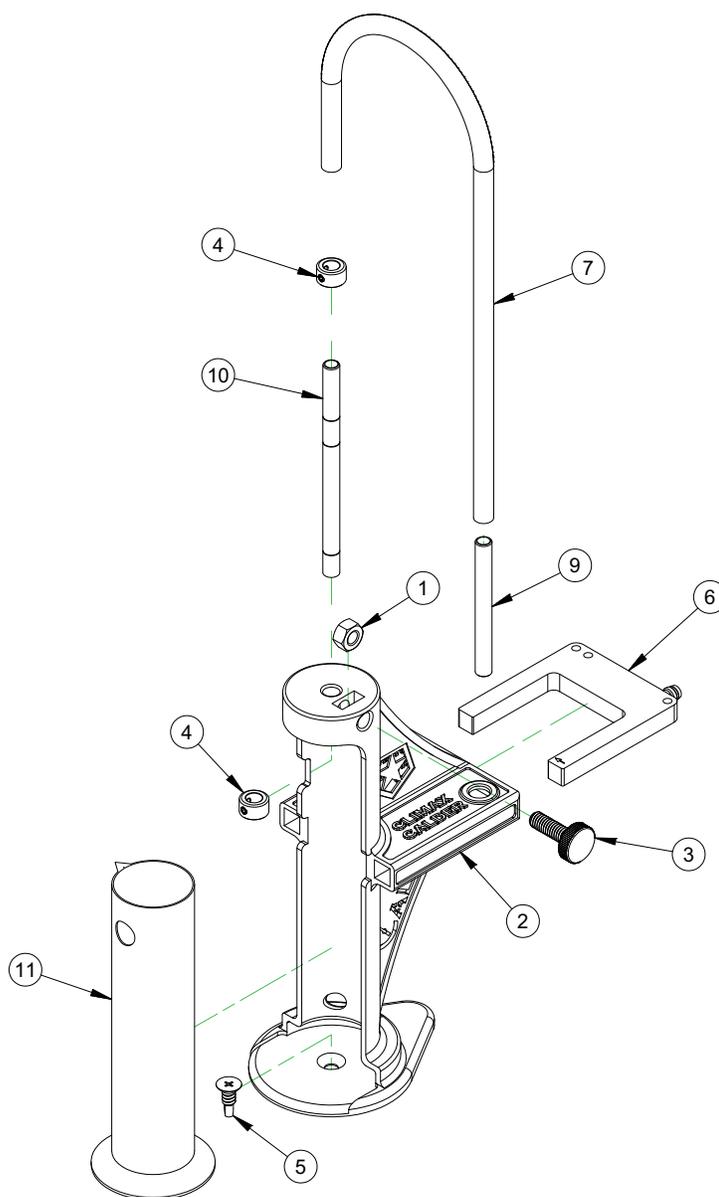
DAAS ASSEMBLY (P/N 87206)	-70
